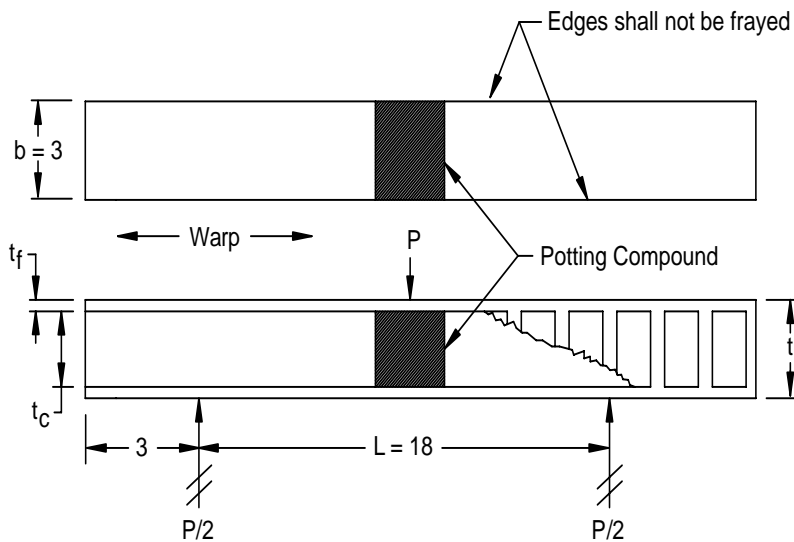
FLEXURE TEST SPECIMEN CONFIGURATION
